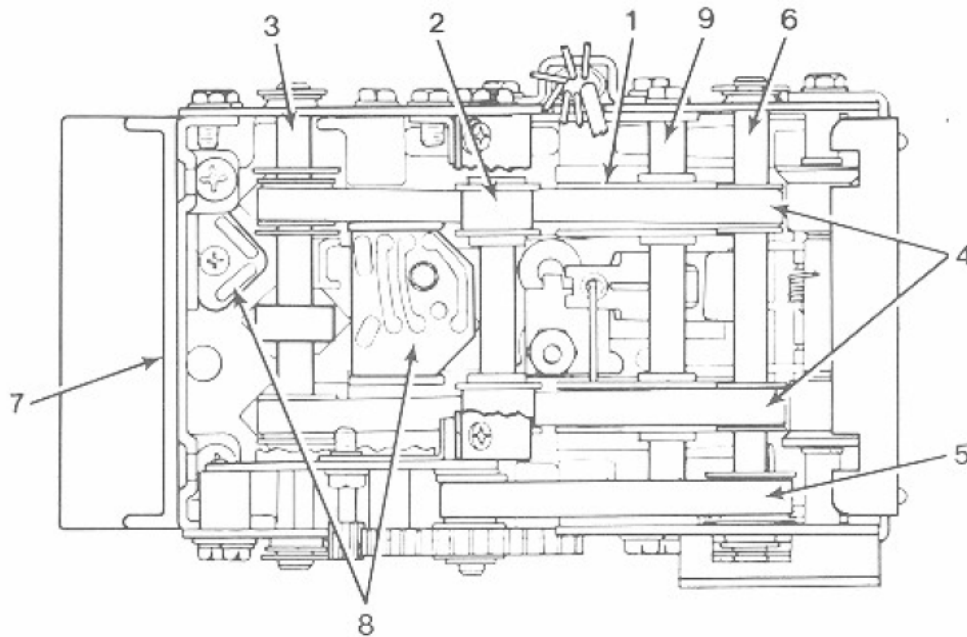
OBA-2 Transport Assembly (Sheet 2)
